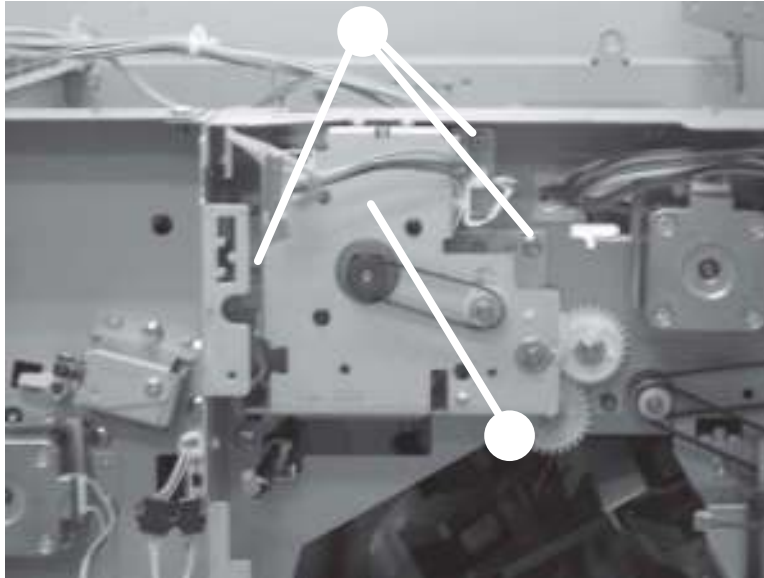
Remove the paper feed drive assembly (1 of 2)
